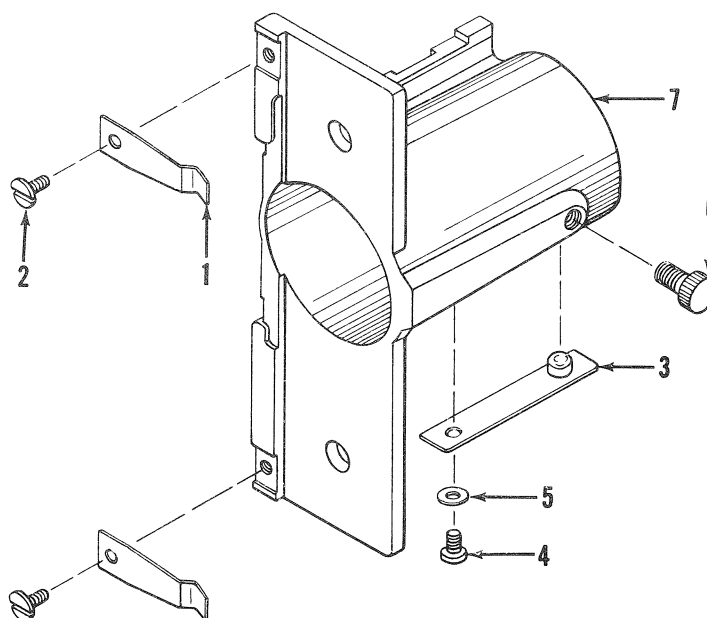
HOLDER ASSEMBLY - PROJECTION LENS
